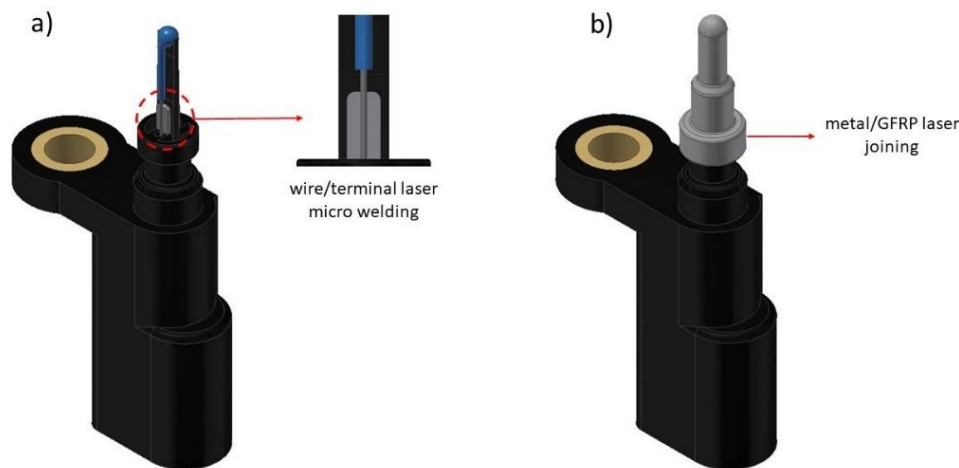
a) wire/terminal laser micro-welding and b) metal/GFRP laser joining for the sensor assembly.
